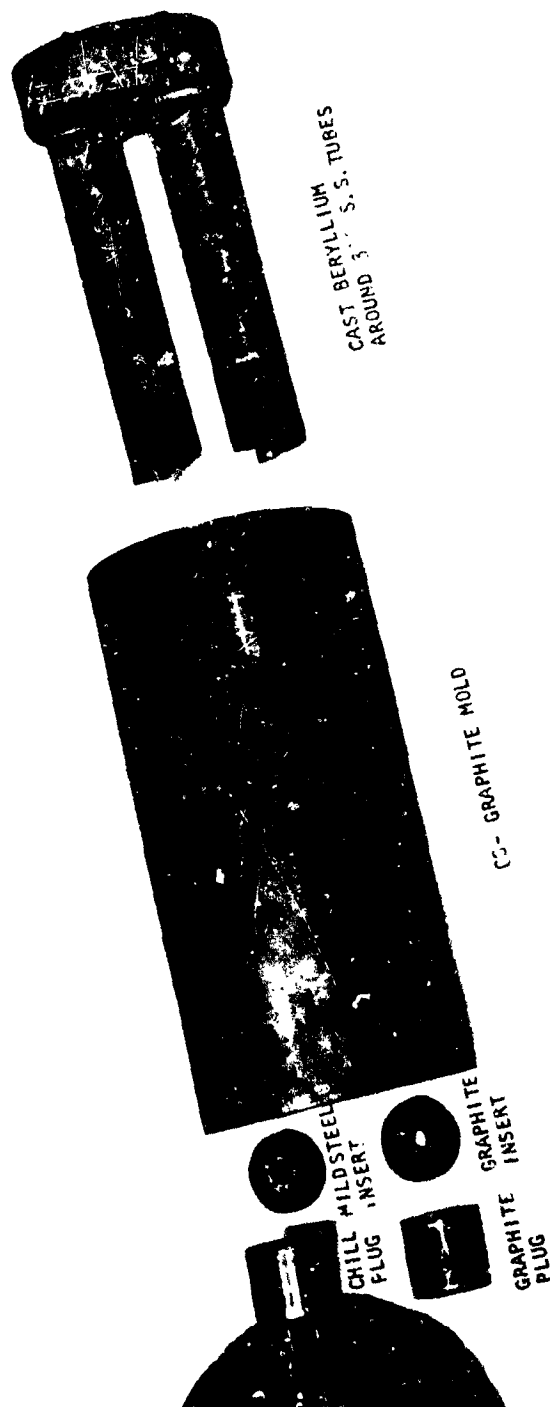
MOLD ASSEMBLY FOR CASTING BERYLLIUM METAL AROUND STAINLESS STEEL TUBES
